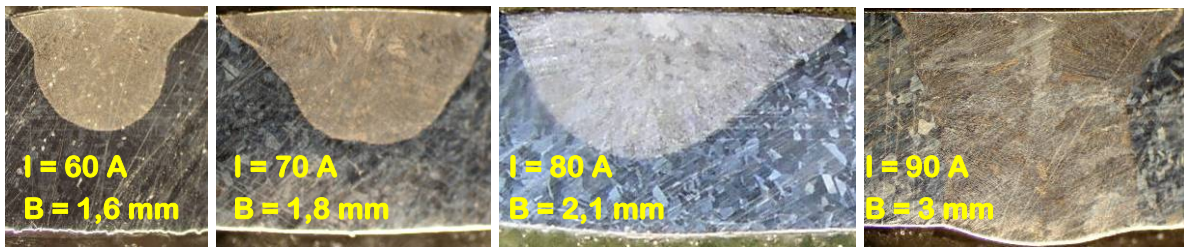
Bead-on-plate weld cross section carried out by ATIG welding (thickness is 3 mm).
